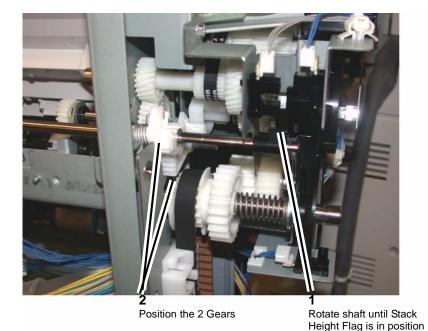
Aligning the Gears and Stack Height Sensor Flag
